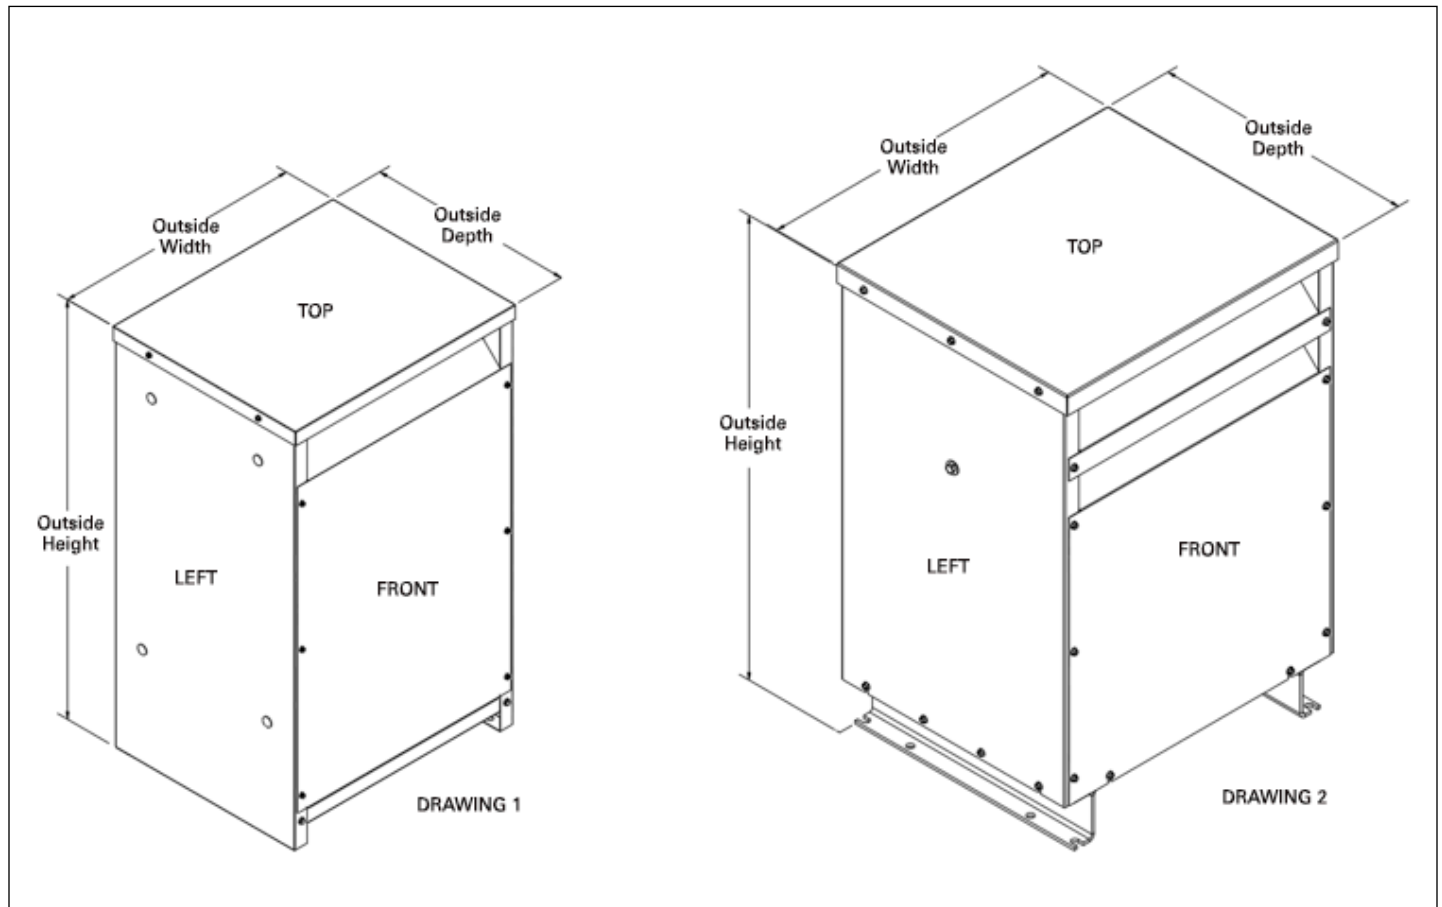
Enclosure Dimensional Drawings—Ventilated Transformers
